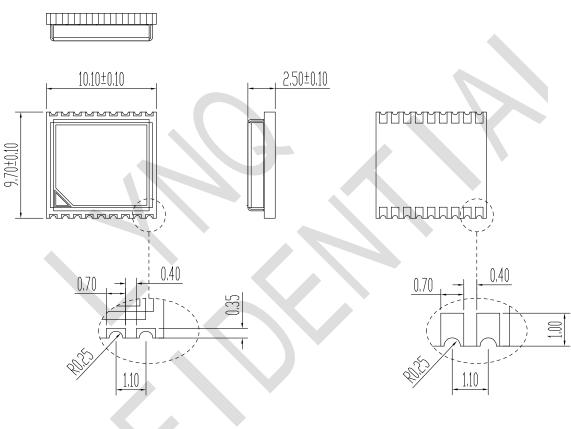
N10 series mechanical dimensions (Unit: mm)
